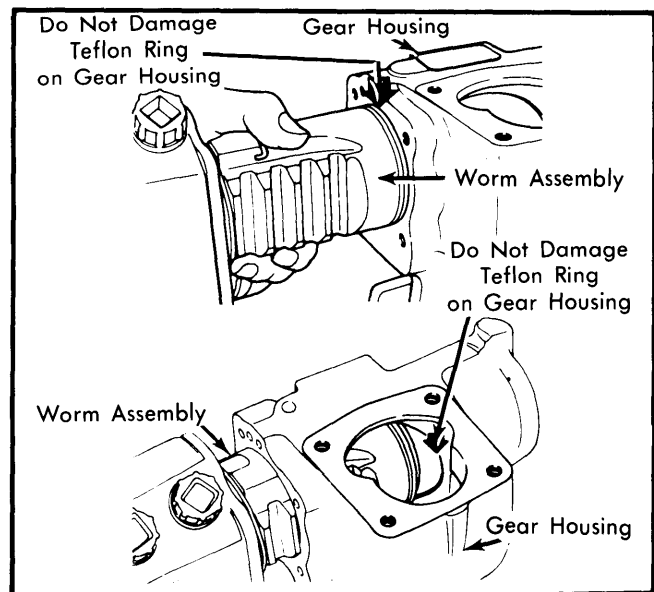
Installing Worm Assembly to Gear Housing. When Half-Way Inserted, Teflon Ring is Deflected.
